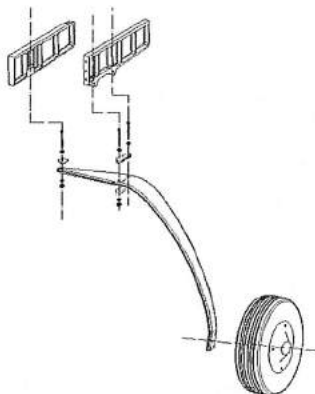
MAIN LANDING GEAR STRUCTURE
